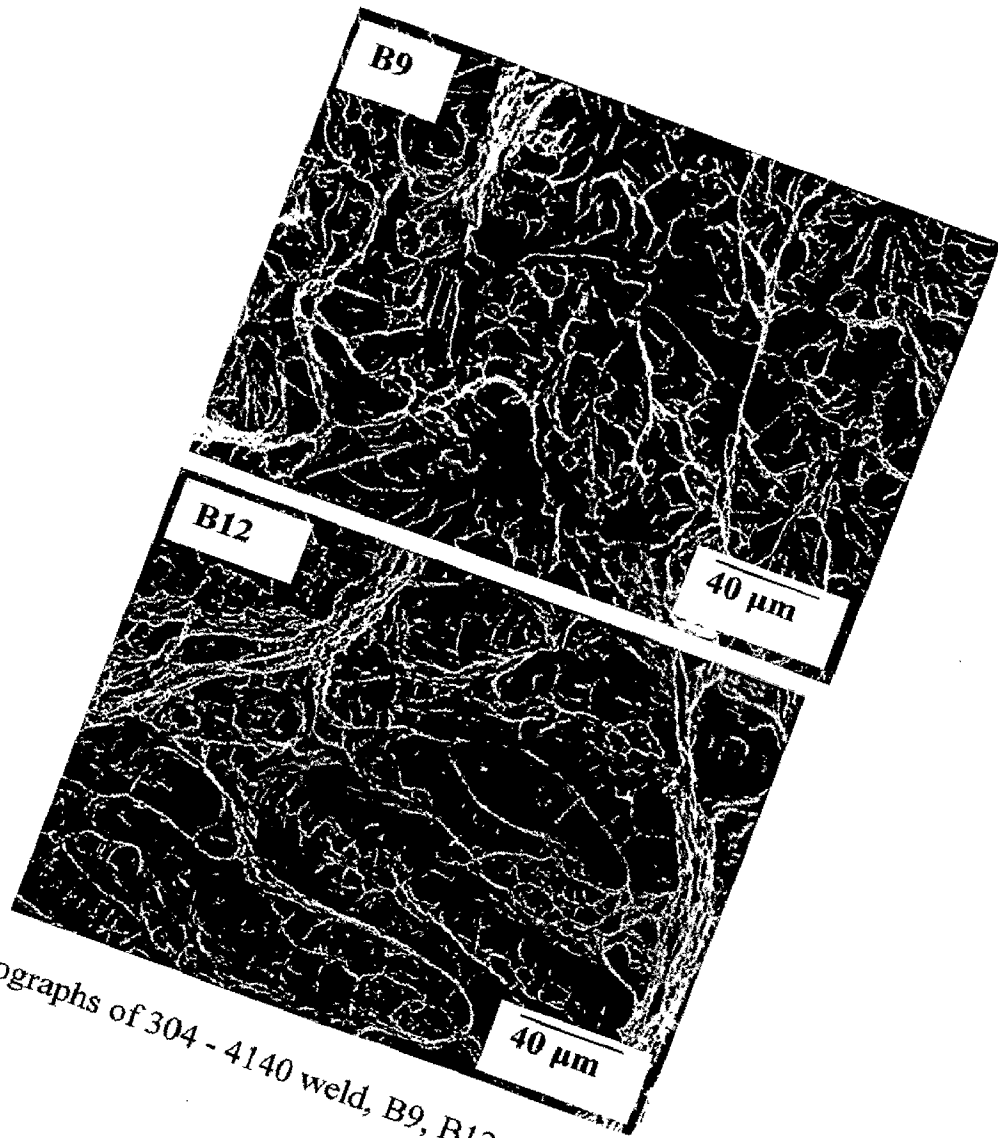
(b) Fractographs of 304 - 4140 weld, B9, B12 at the center (Burn-off length 9, 12 mm)
